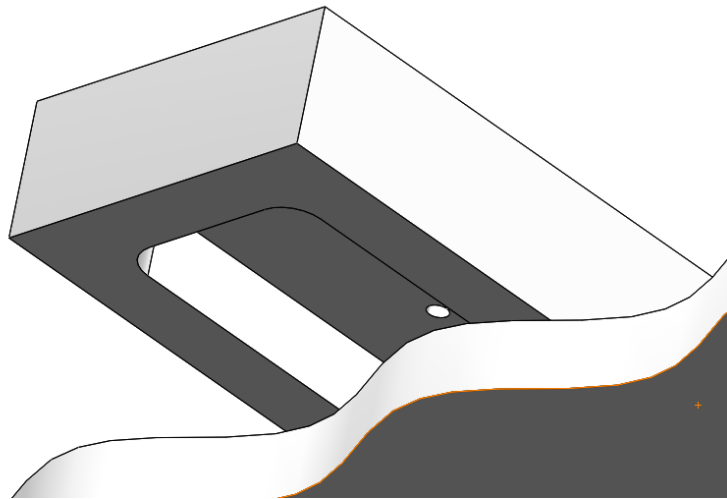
A three dimensional exploded view of a hydrostatic bearing.
